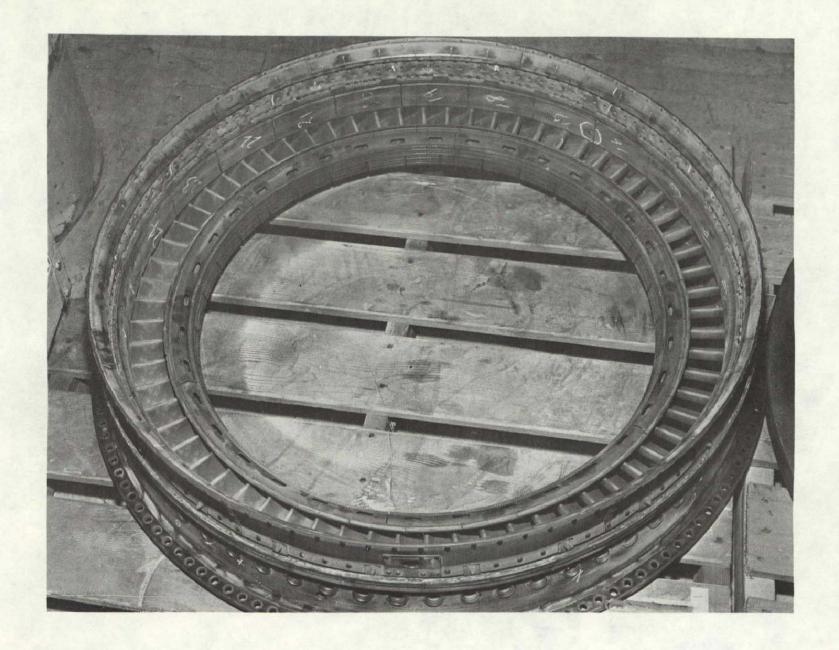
HP Turbine Nozzle Assembly, Overall View, Forward End.
